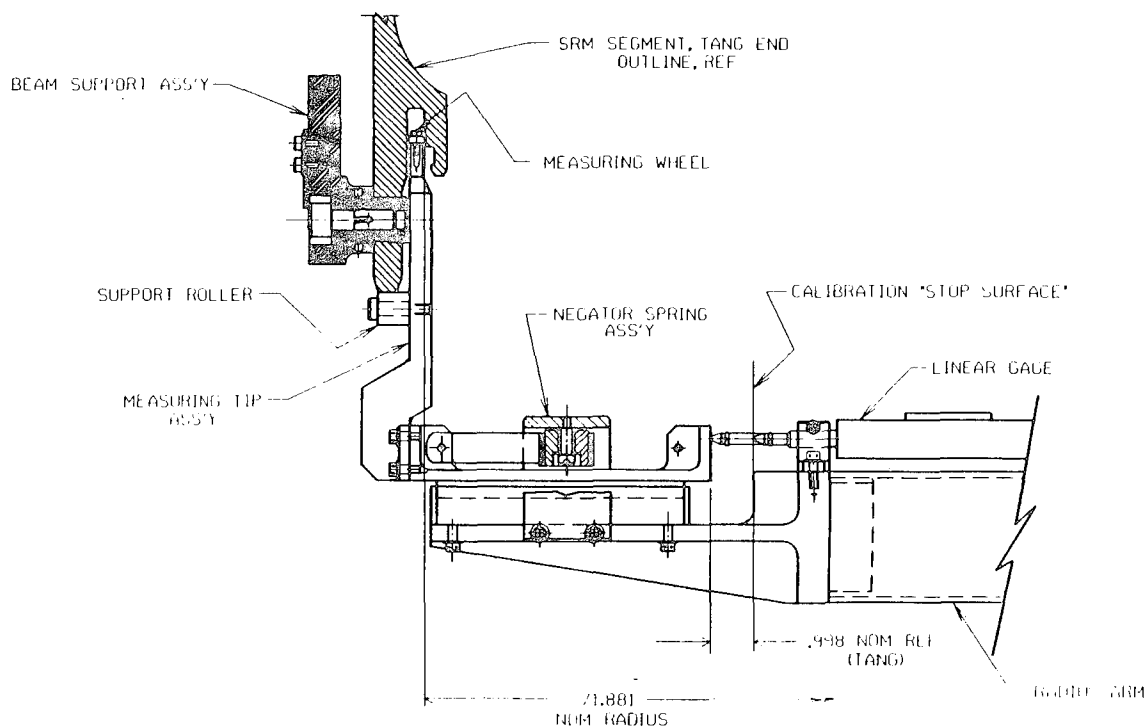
SRM Profile Measuring Tool, 97M50380-11, Tang Inner Leg I.D.
